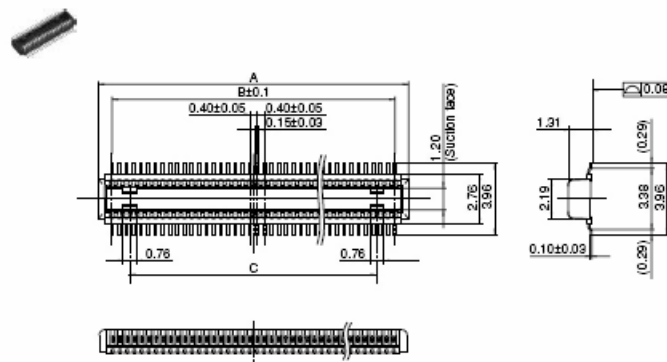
NAIS AXK870145WG board-to-board connector pin side
